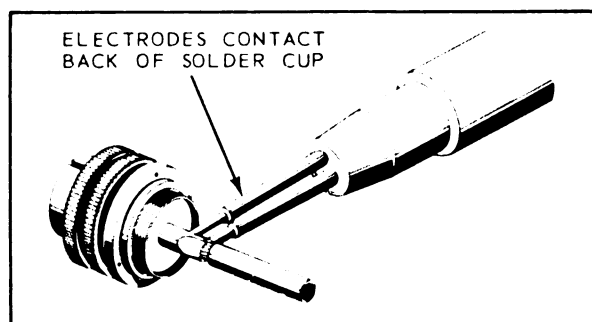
Resistance Soldering Pencil for Small Contacts
